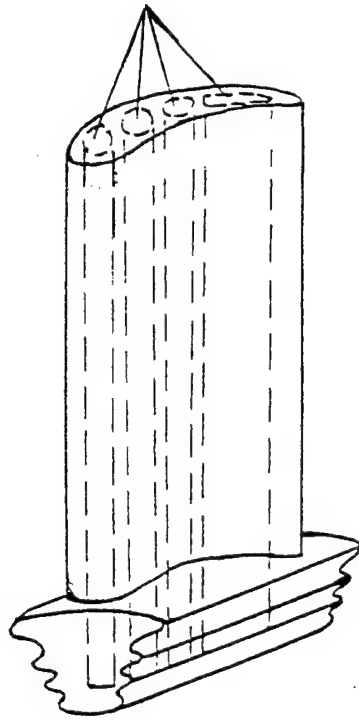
Schematic of radially rotating heat pipe cooling for turboengine blades.
